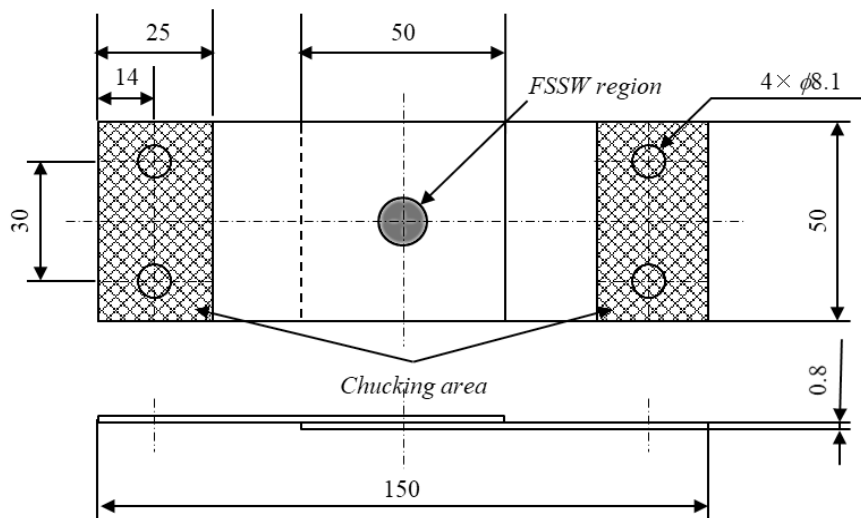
Shape and dimensions of FSSW specimen (Tension shear type), (unit : mm).
